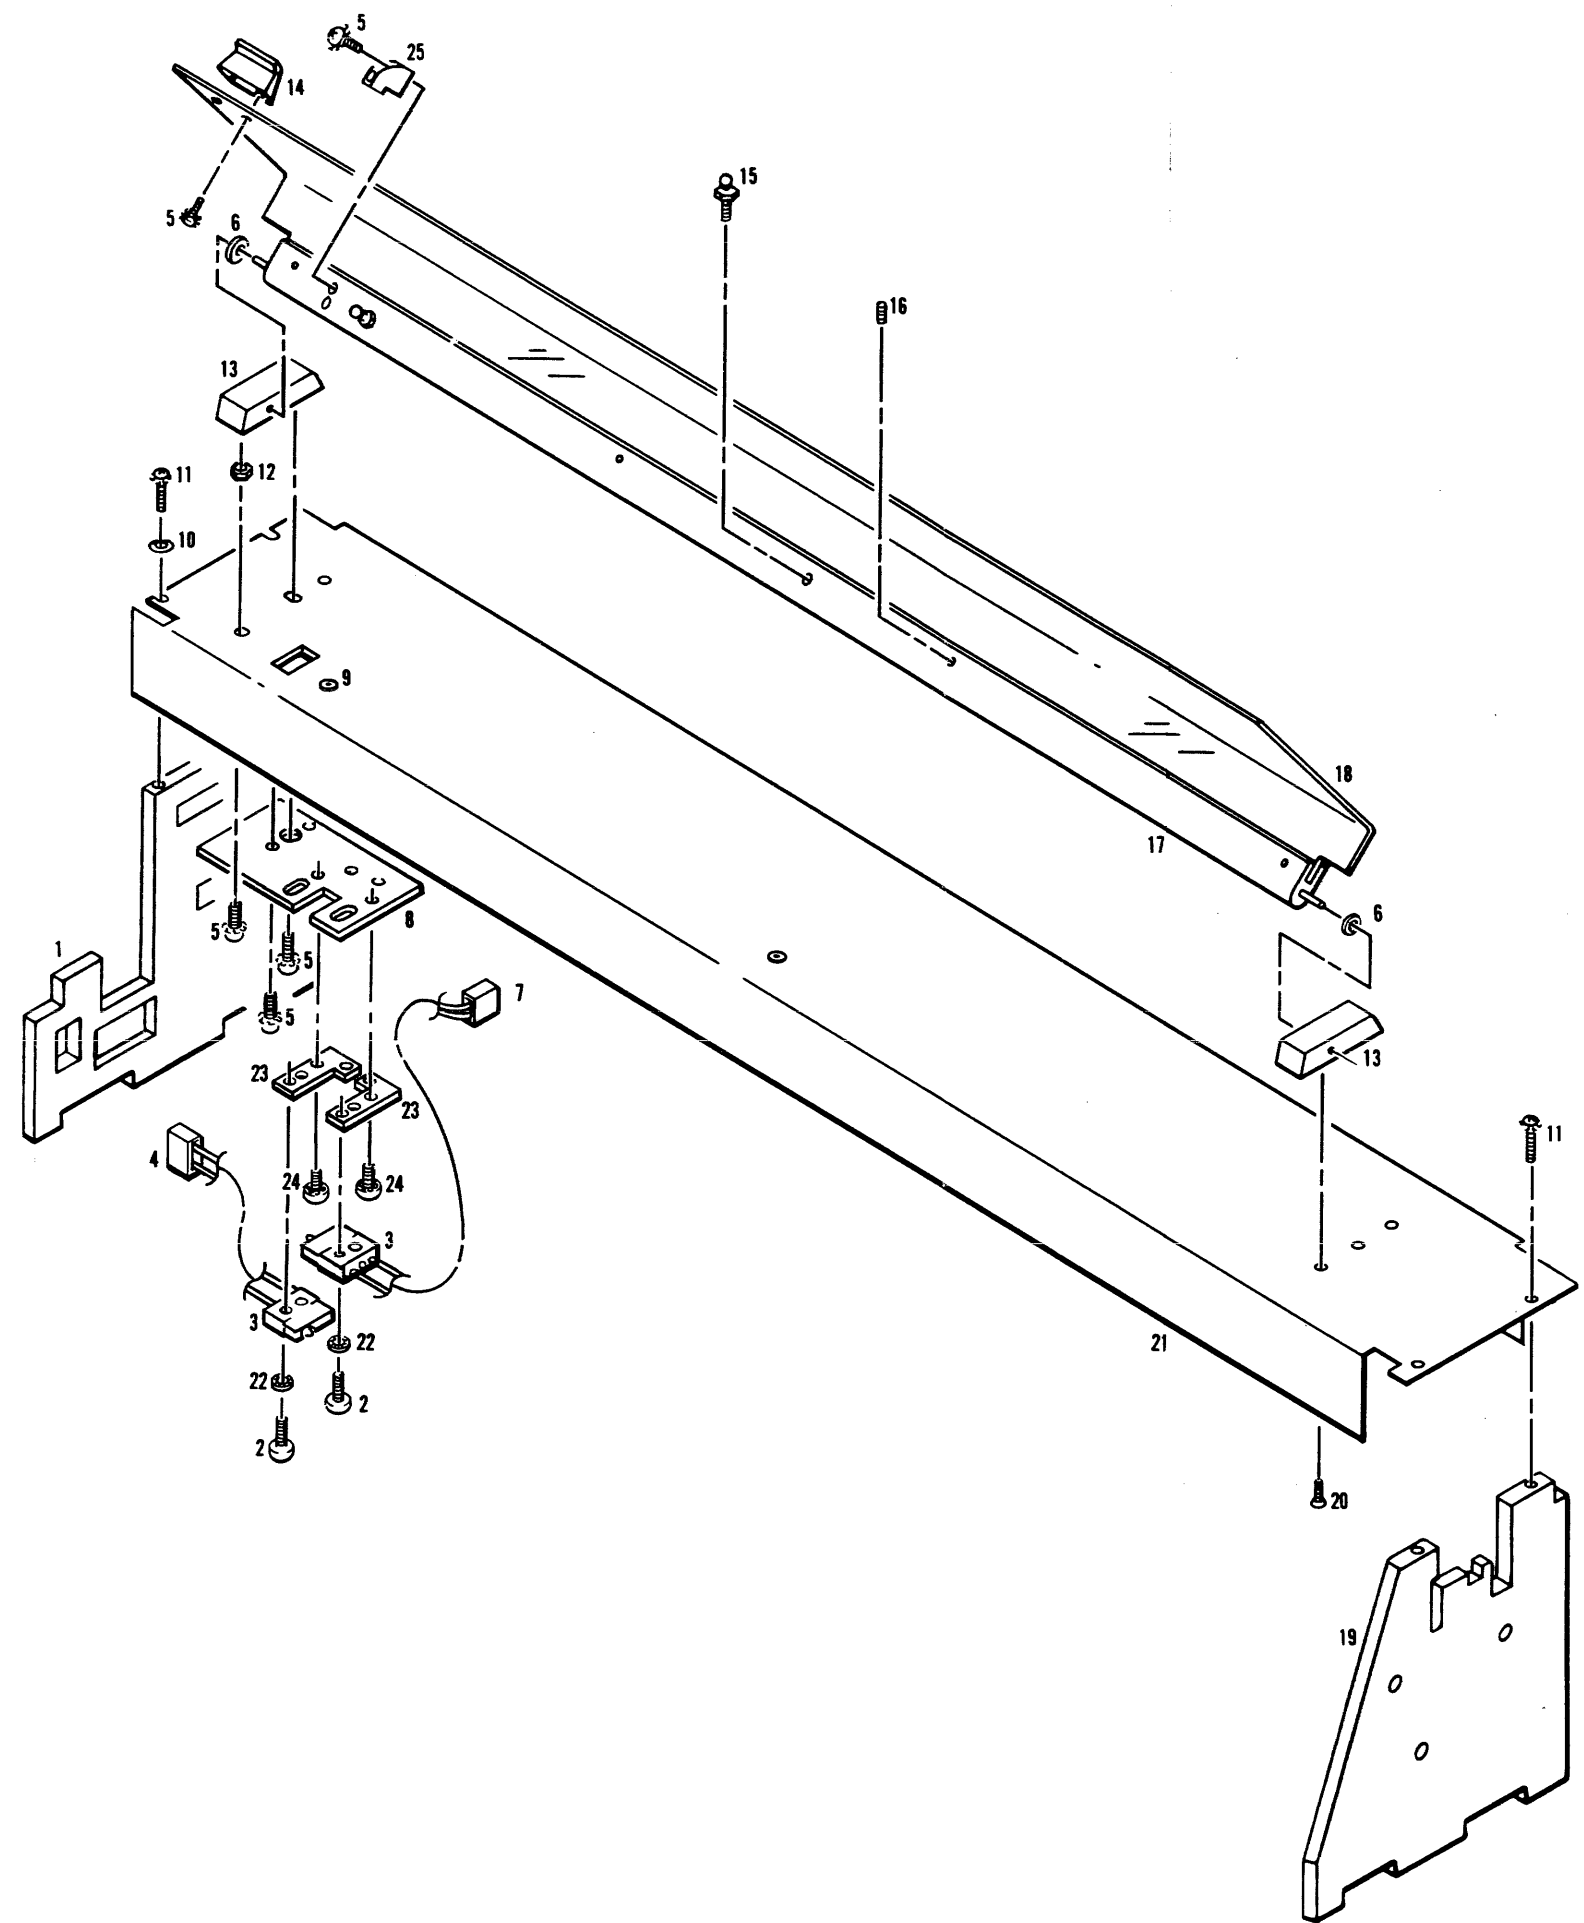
Carriage and Y-Arm Cover Assemblies, Illustrated Parts Breakdown
